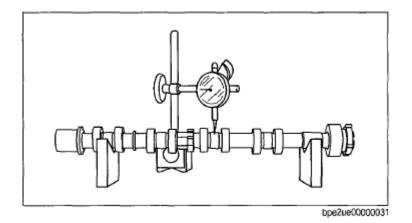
Measuring Camshaft Runout Using Dial Gauge
